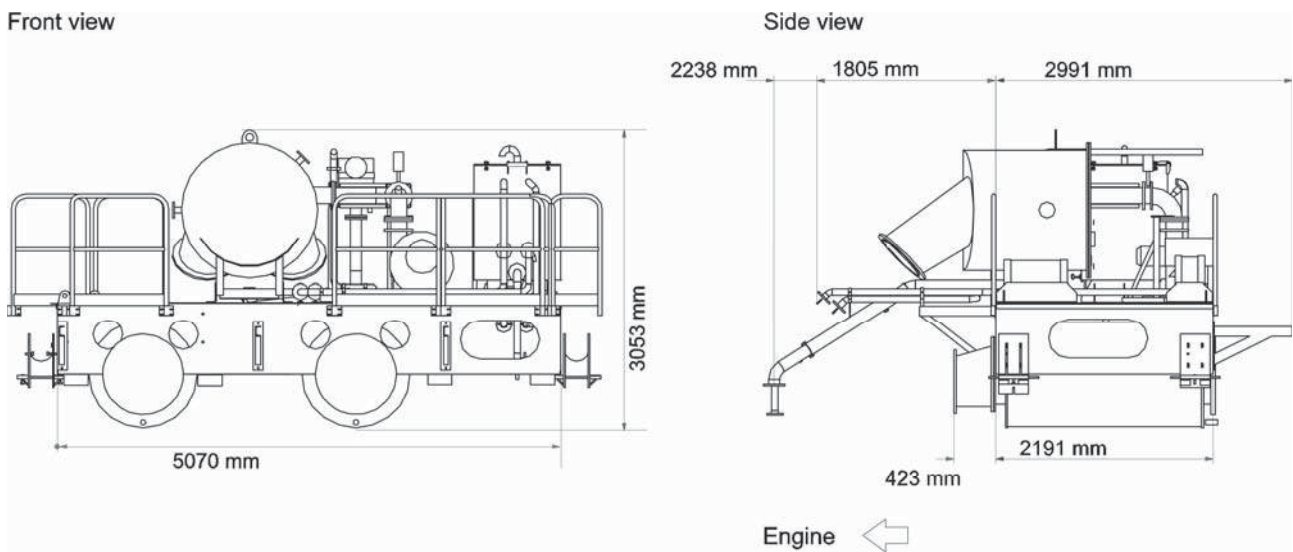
Wärtsilä 16V and 20V34SG Exhaust gas module dimensions
